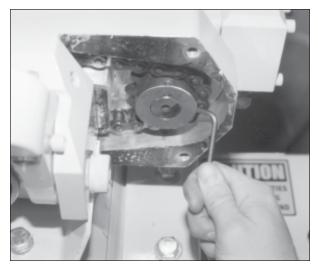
Loosen set screws at base of 12-tooth sprocket.
